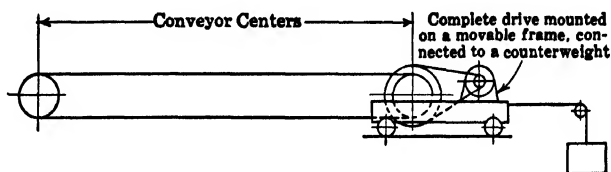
Single Counterweighted Take-up for a Reversible Conveyor.
